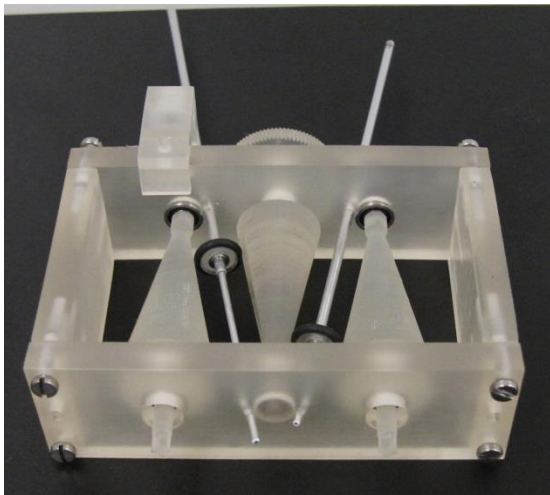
Prototype 1 design of a dual cone continuous variable transmission.
